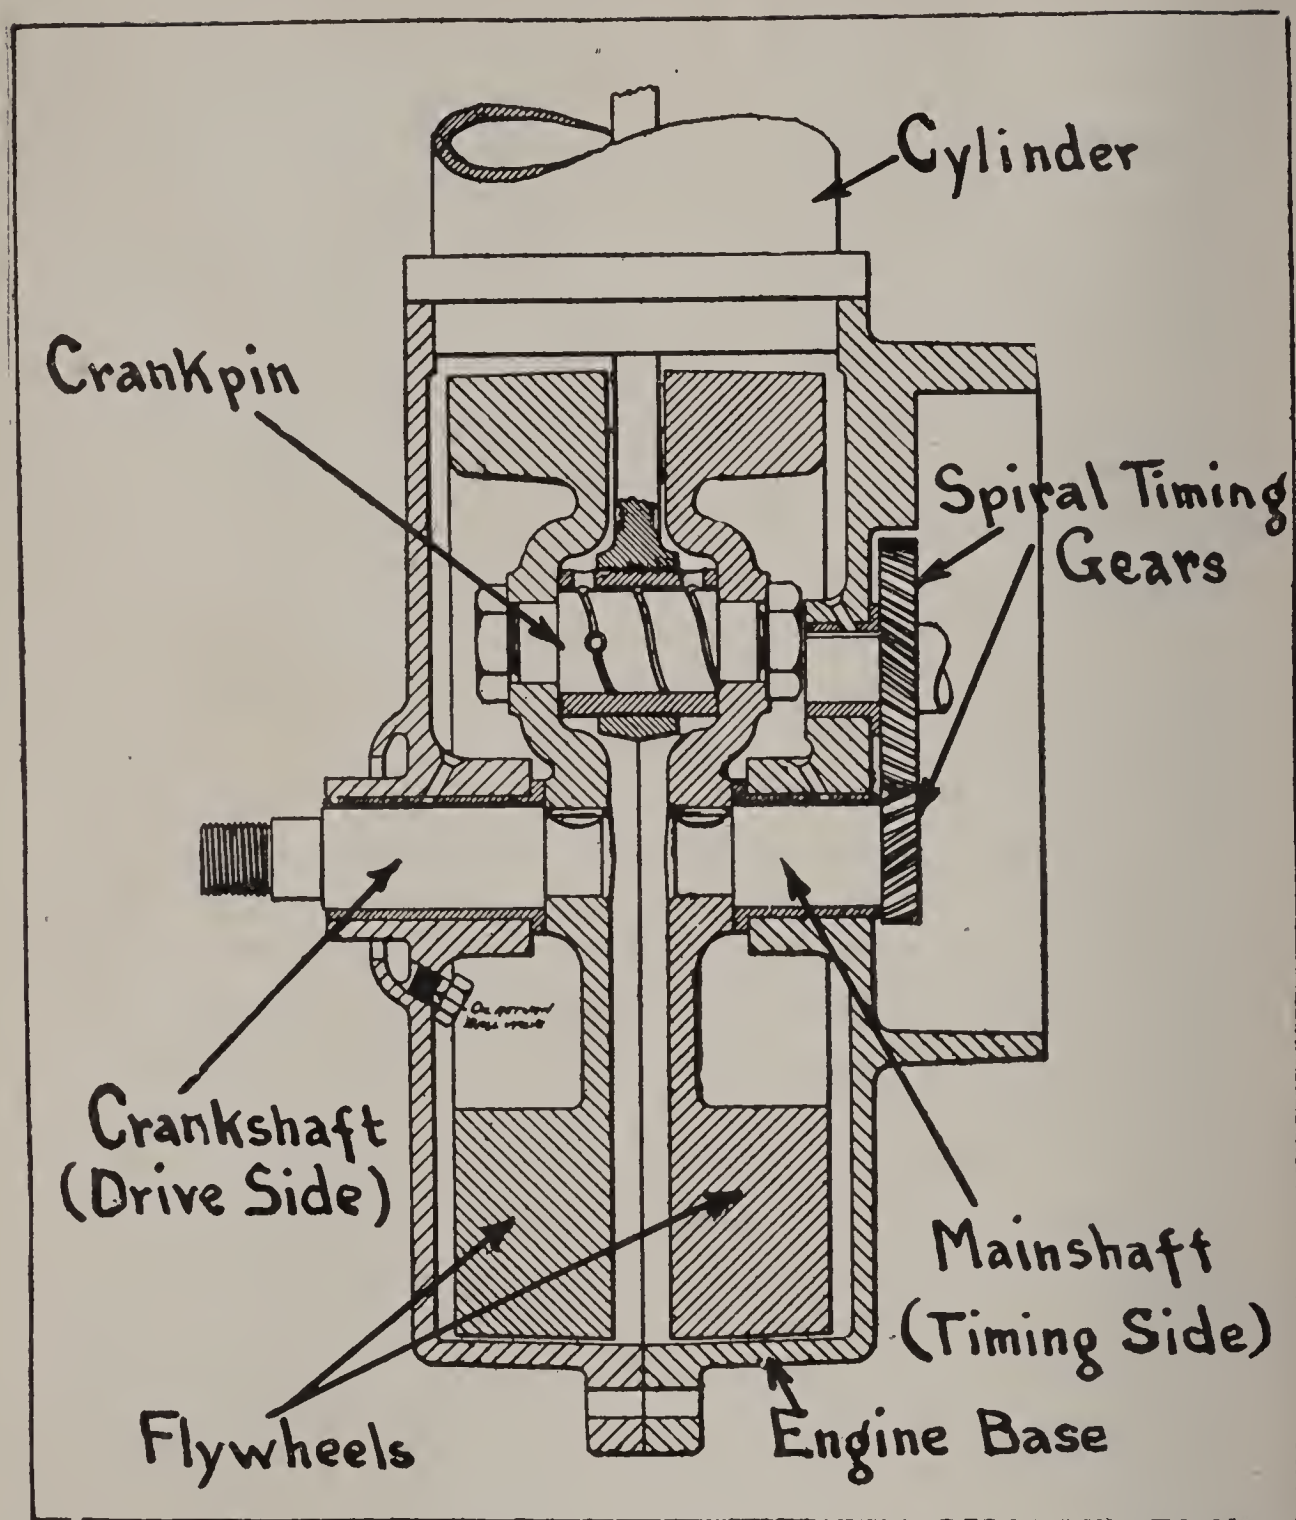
Sectional View of Crank Case of AMC Motor, Showing One Method of Assembling Built Up Crank Shaft in Which the Flywheel Webs are Utilized for Supporting the Crankpin.
